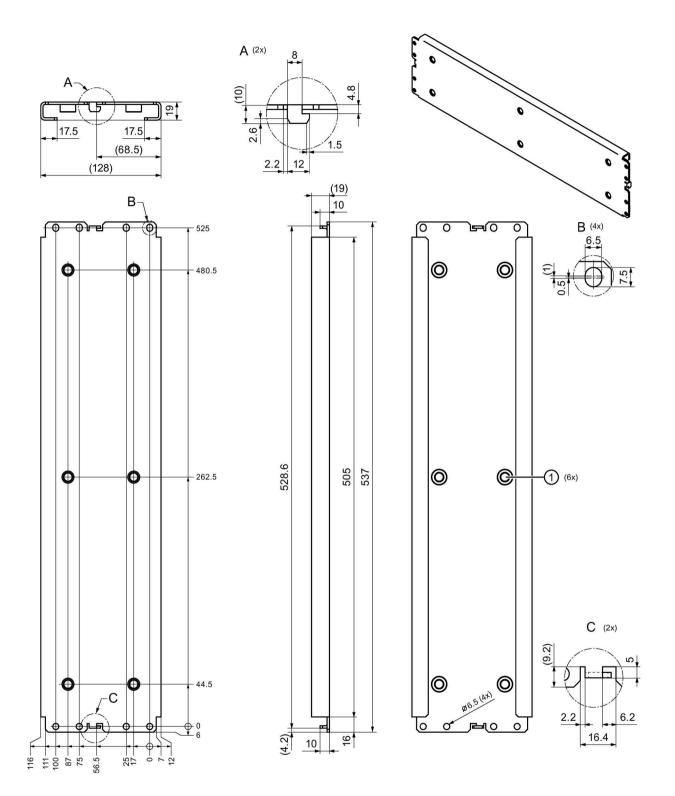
Mounting plate for a Rittal TS8 control cabinet
